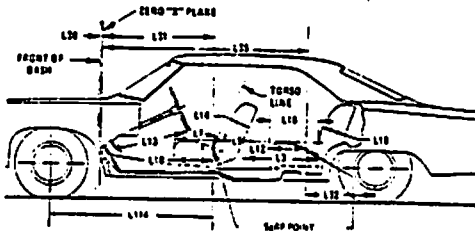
INTERIOR DIMENSIONS, LENGTH
